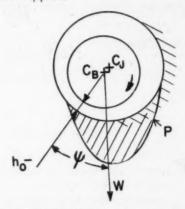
GAS BEARING Principle depends on load-bearing strength of film of helium gas. Built up by shaft rotating in a concentric bearing shell. W is load on bearing;  $\psi$  is attitude angle; ho, minimum film thickness; P is pressure profile providing support.
